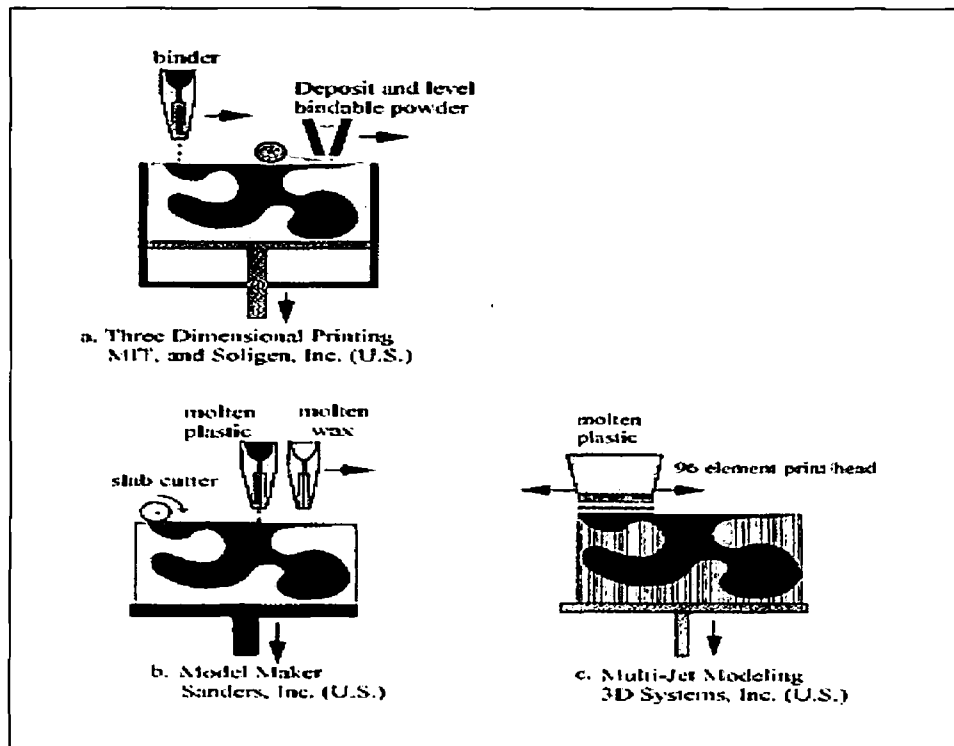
3-D printing machines (a) three dimensional printing MTT. And Soligen, (b) model maker sanders and (c) Multi-jet modeling 3D Systems
